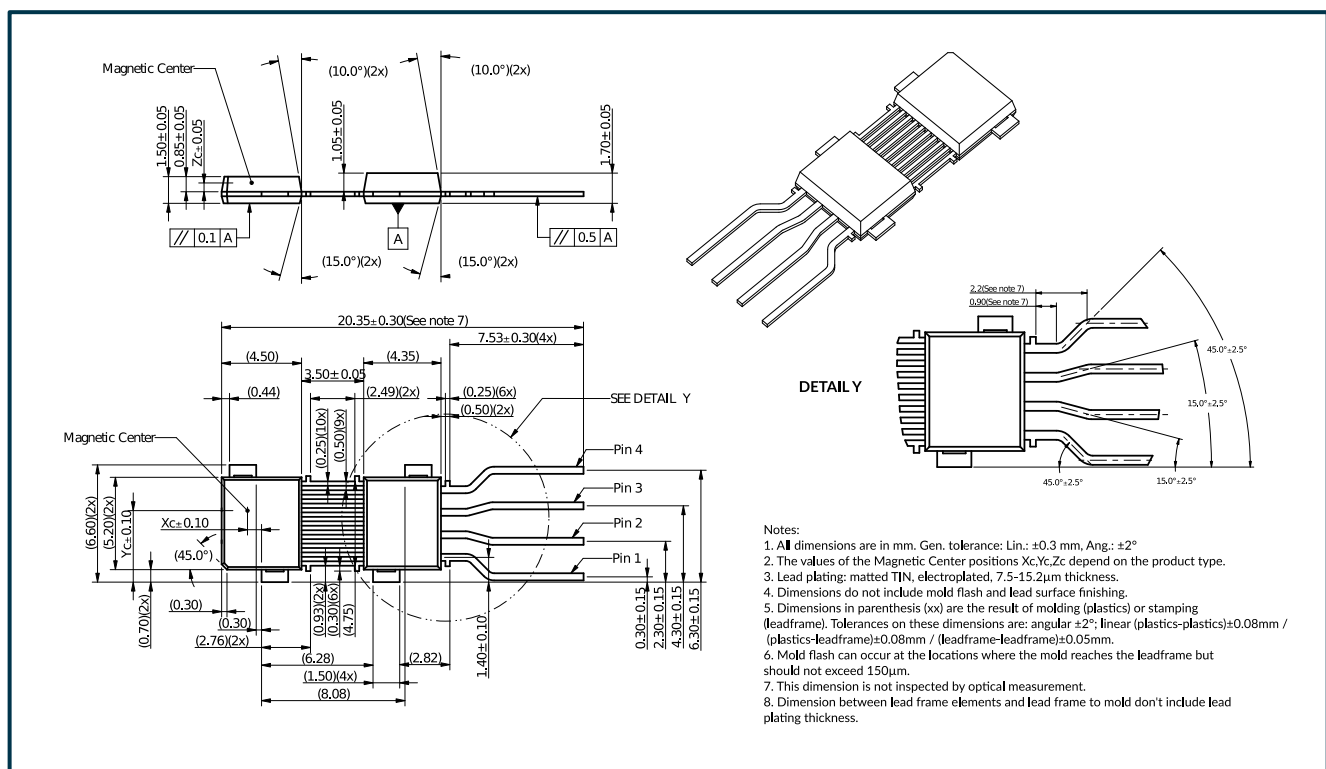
DMP-4 STD3 2.00 Package Outline Drawing
